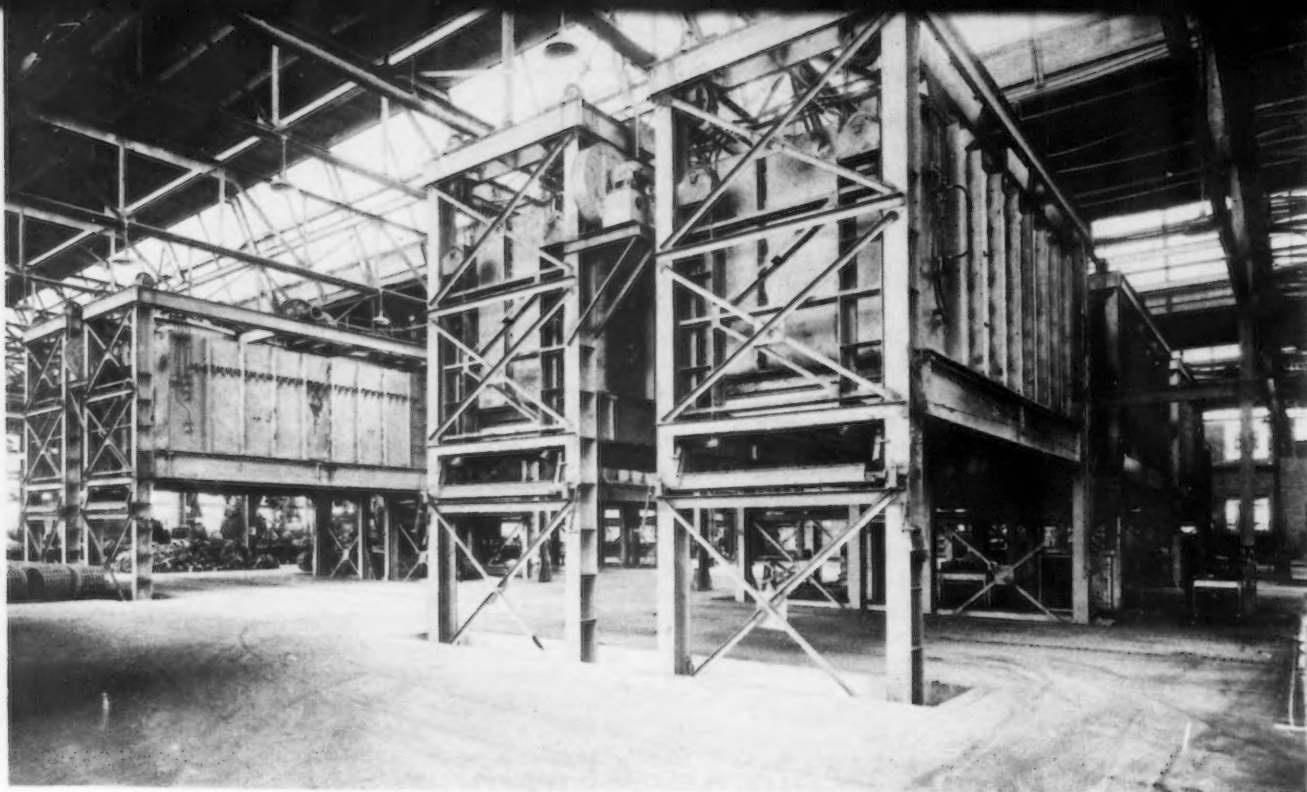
Installation of 12 GE elevator electric furnaces for annealing malleable iron castings, consisting of six groups of two furnaces per group (one high-temperature and one low-temperature). Car Loading platform is 5 ft 7 in. wide, 21 ft 10 in. long. Loading height 52 in. (approx 16 net tons per charge).
